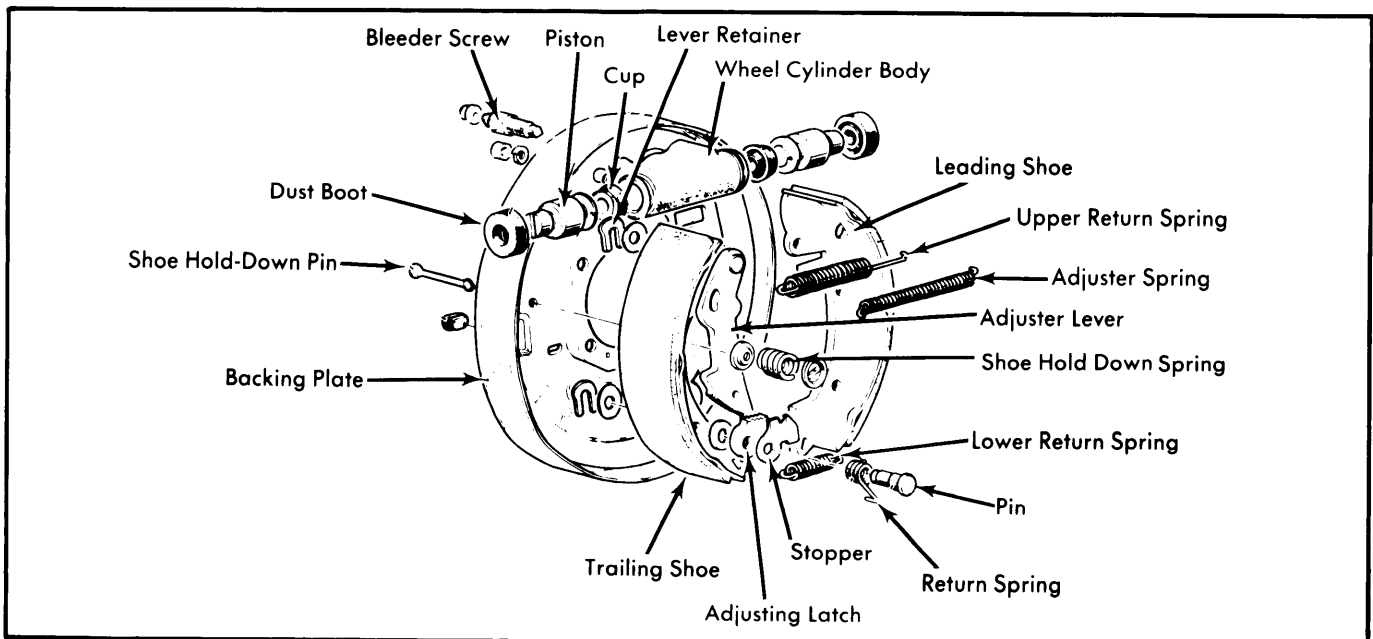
Exploded View of Rear Brake Assembly for Component Relationship
